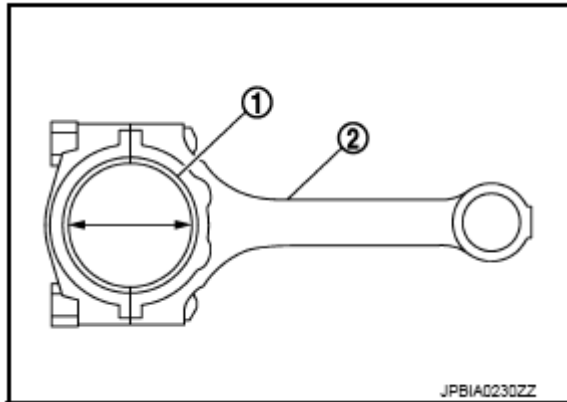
Identifying Connecting Rod Bearings And Connecting Rod
